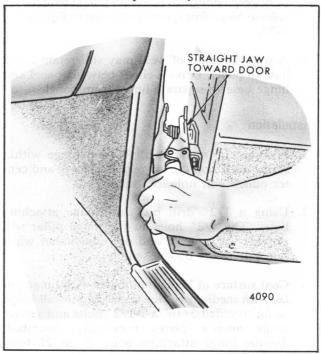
Front Door Hinge Hold-Open Spring Installation Using Tool J-23497 or Equivalent - "X" Styles
